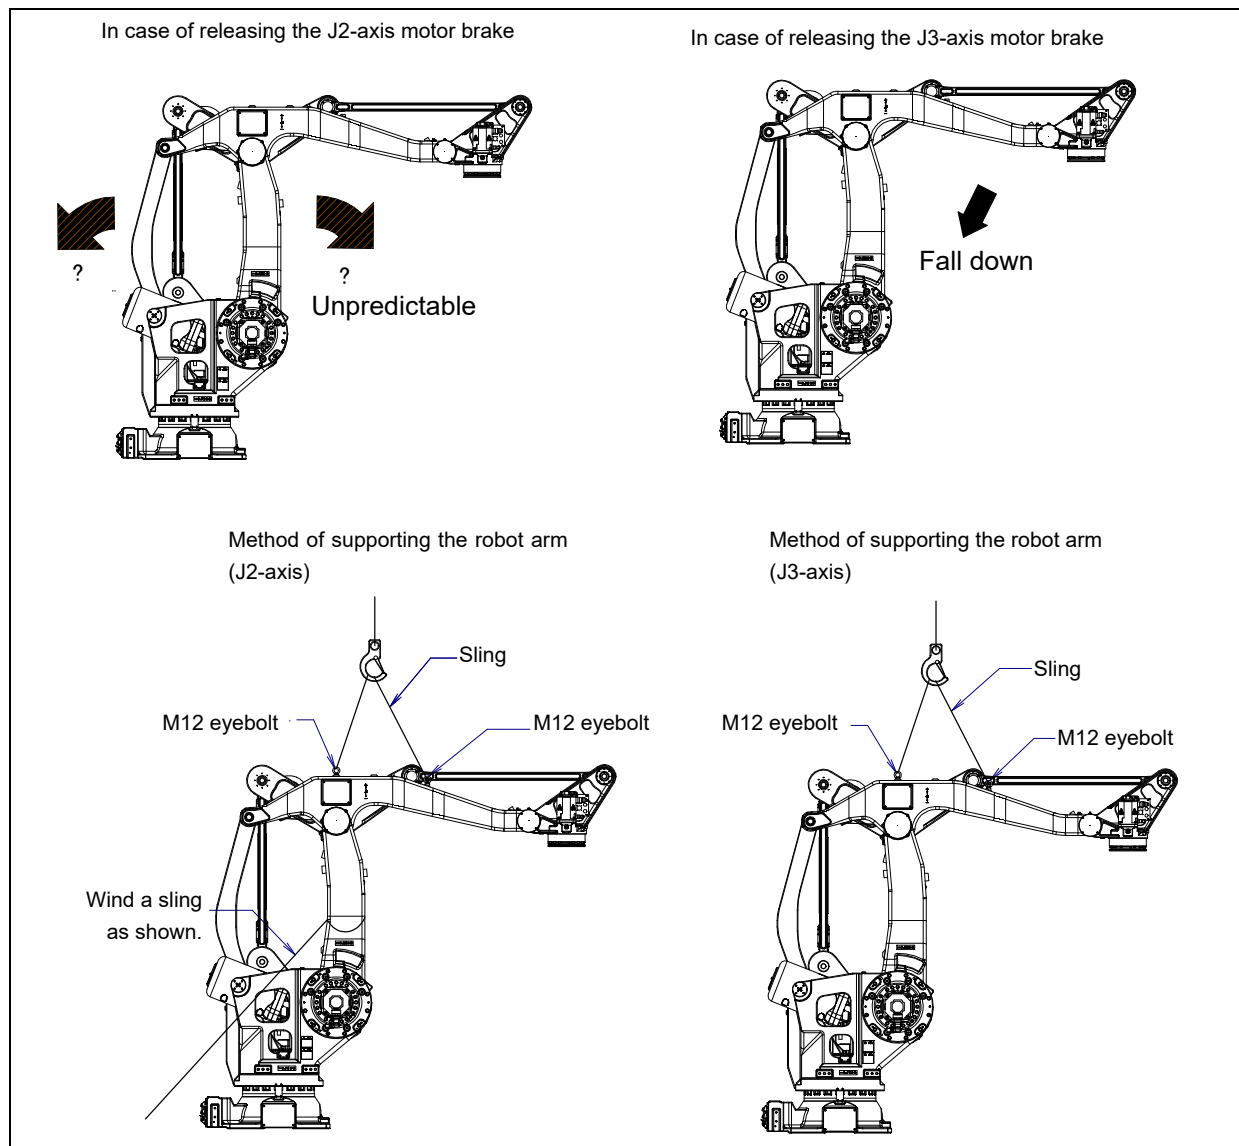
(b) Releasing J2/J3-axis motor brake and measures (M-410iC/500)
